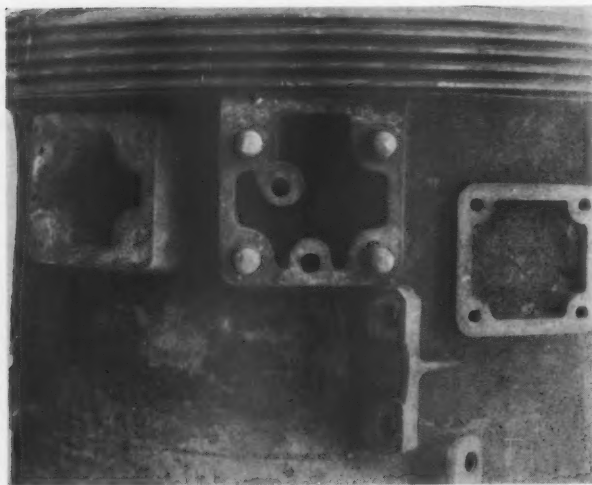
DESIGN SHOWING CARE TAKEN TO AVOID INEQUALITIES IN SECTION OF CASTING.
